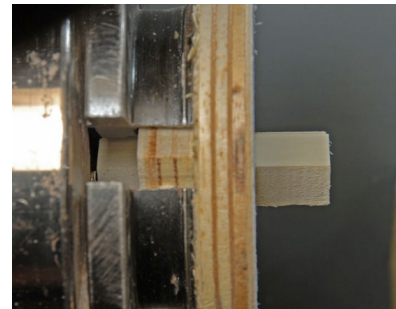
The blank will be held more securely if the jaws grip the blank in the middle.
